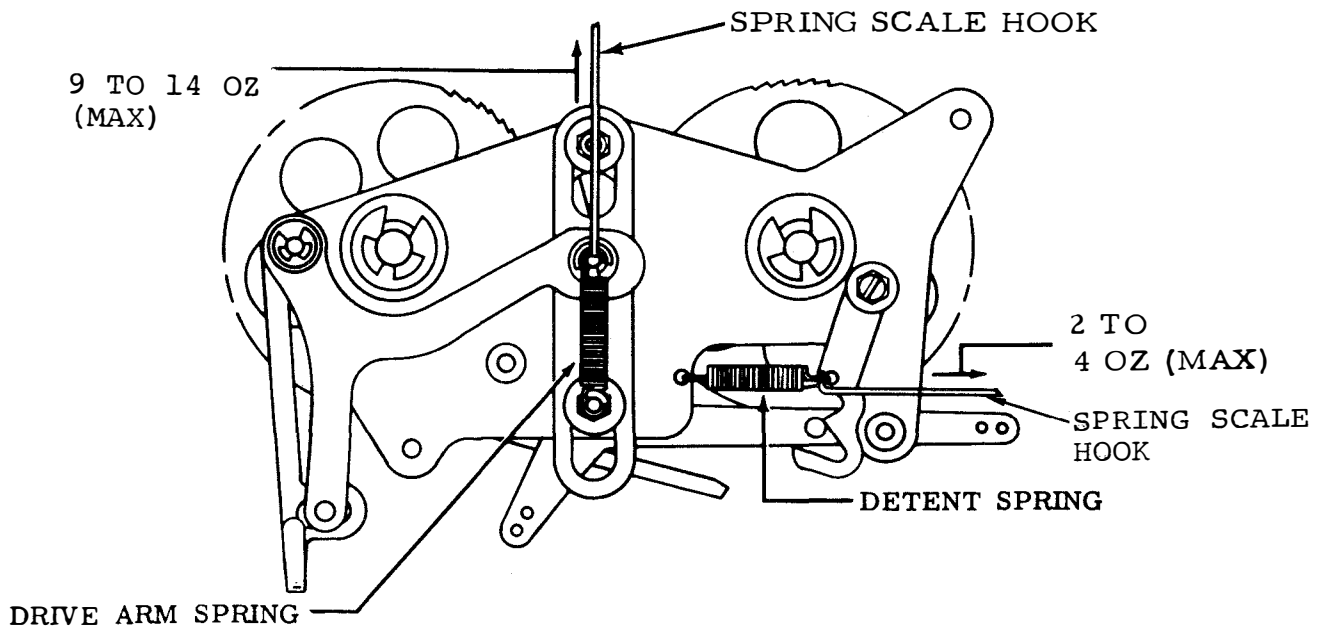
Drive Arm Spring and Detent Springs, Rear View
